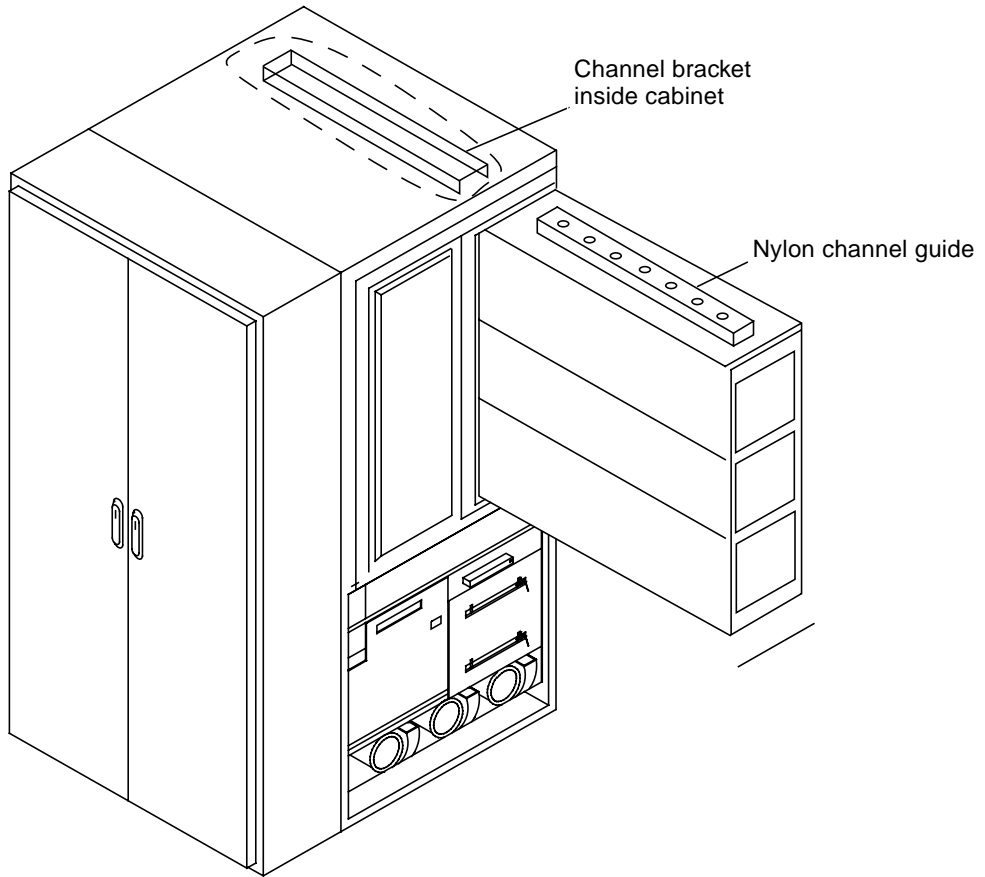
HDSA Drawer Channel Guide Adjustment Diagram
